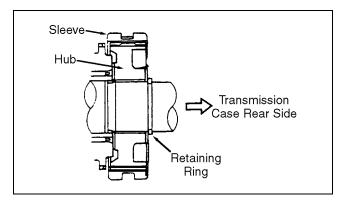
H-31. Main Shaft Assembly ó Steps 8 and 9
